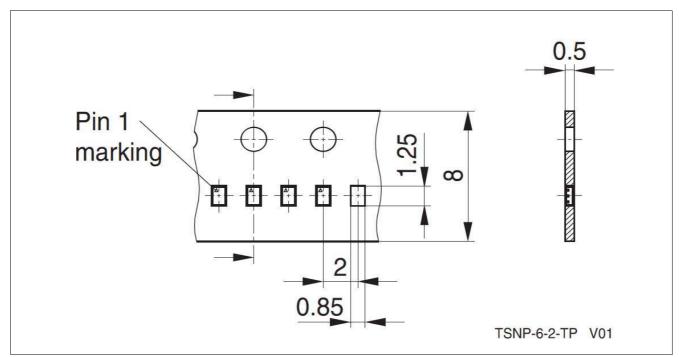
Tape & Reel Dimensions TSNP-6-2 (reel diameter 180 mm, pieces/reel 15000)
